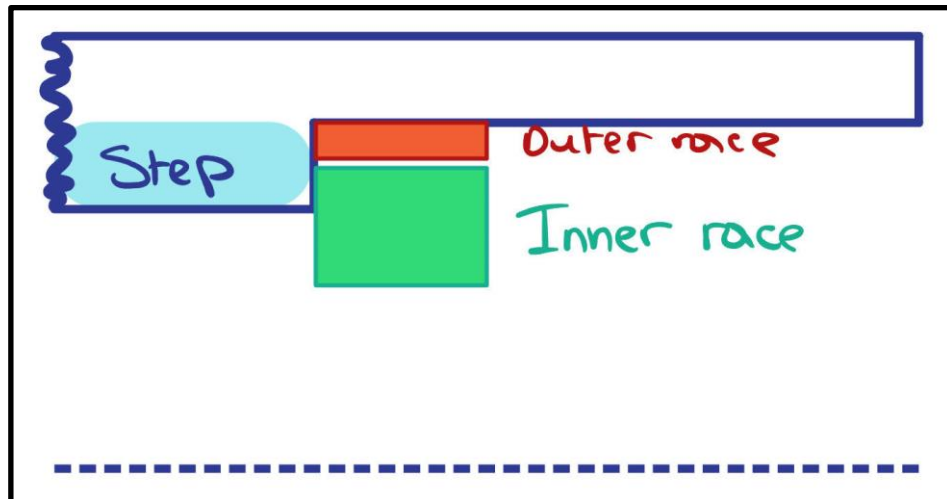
Interference of the Housing Step and the Bearing Inner Race.
